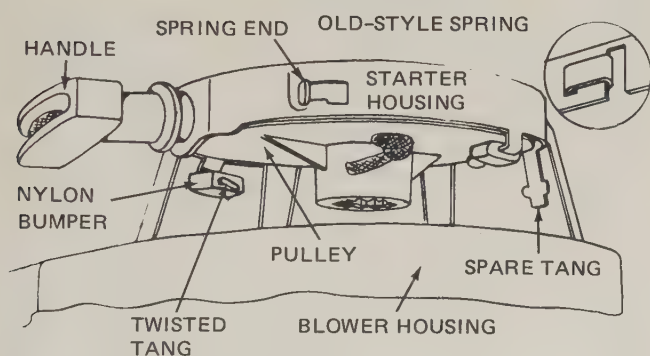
A removable type of recoil spring. The end of this spring can be seen from outside the starter.
